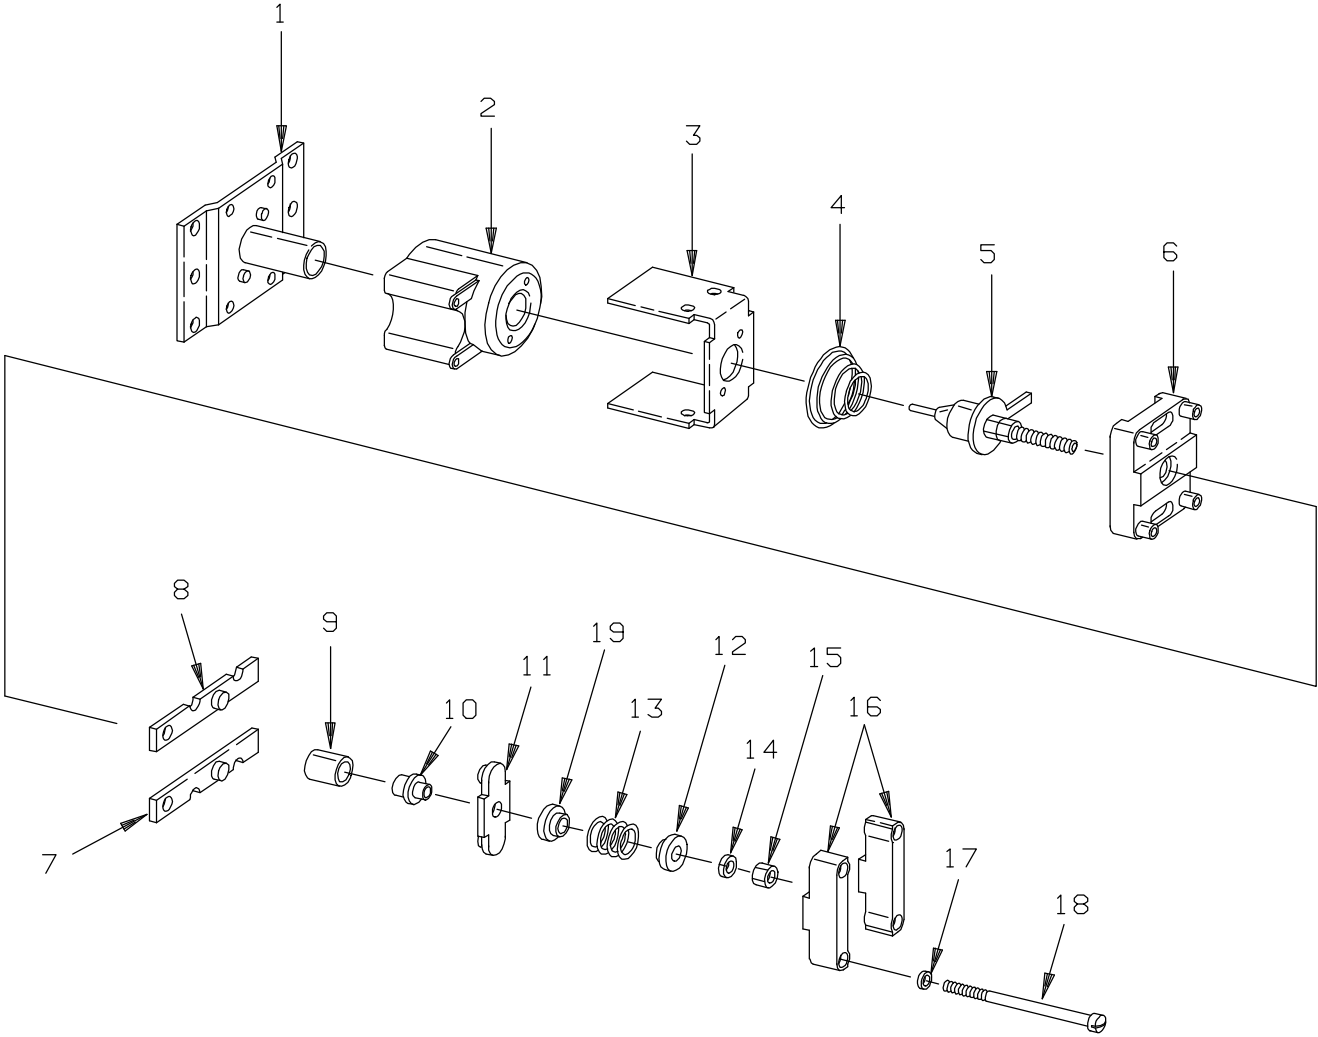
POWER CONNECTOR ASSEMBLY
